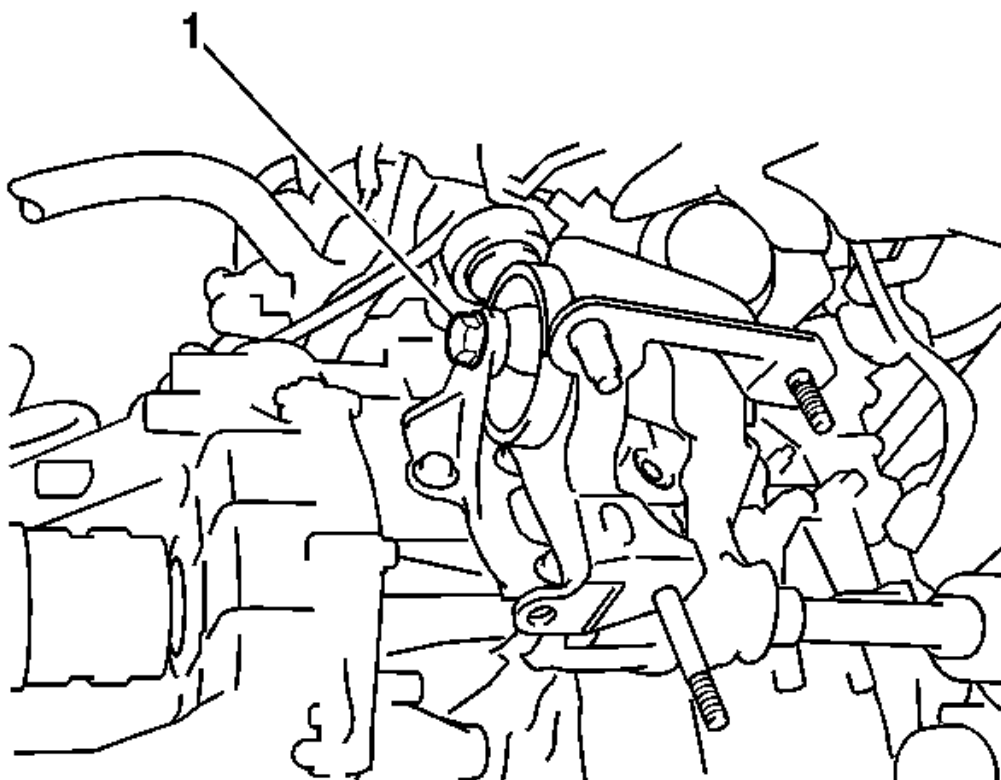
Identifying Rear Engine Mounting Insulator Through Bolt
